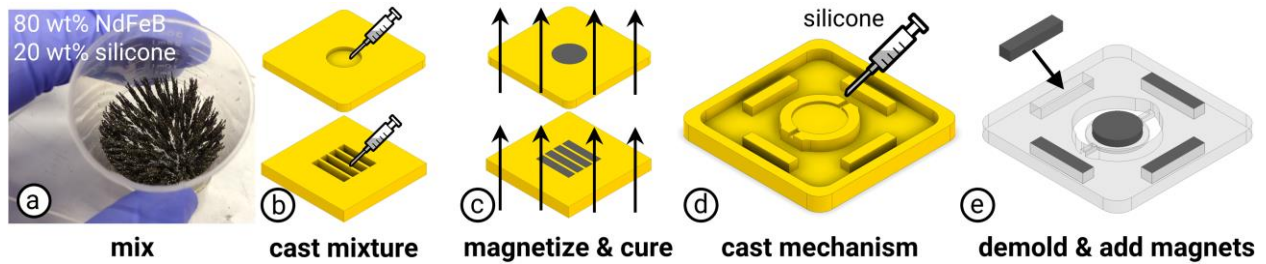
We fabricate MagnetIO patches by: (a) doping silicone with magnetic powder, (b) casting the doped silicone mixture into 3D printed molds of the desired shape, (c) curing the mixture in a strong, external magnetic field, (d) casting our mechanism out of silicone, and (e) adhering the soft magnets to the silicone mechanism
